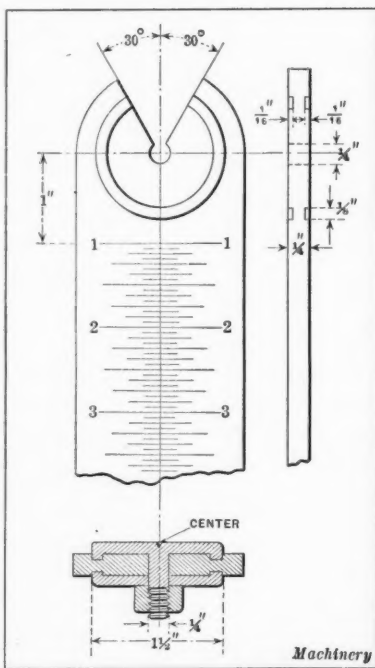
Plan and Cross-section of Radius Arm Hinge
